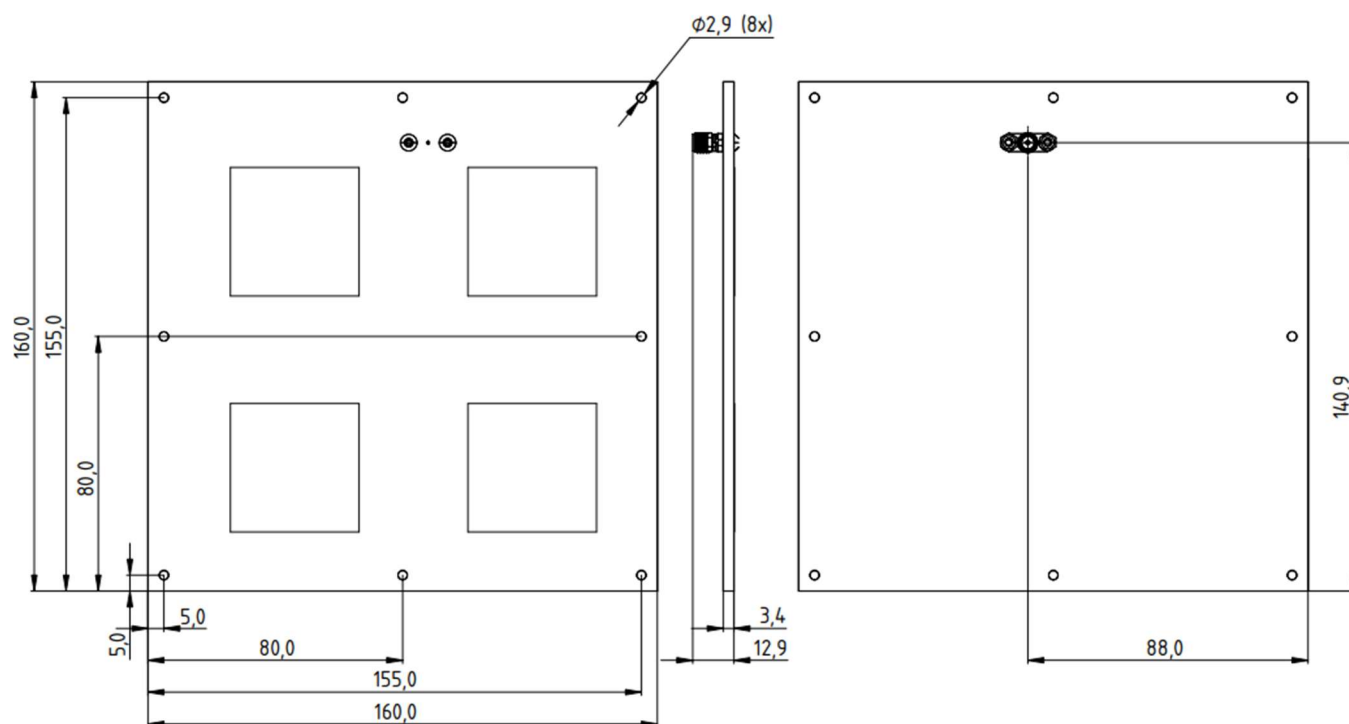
Mechanical dimensions and positions of RF connectors. All tolerances for all mechanical dimensions are $\pm 0.1\text{mm}$, for connector $\pm 0.5\text{mm}$ and high (z-dimension) $\pm 10\%$. These are based on manufacturing tolerances by the PCB manufacturer.
